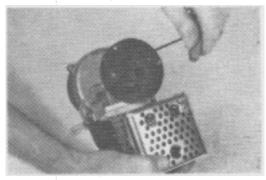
Remove four mounting screws from reed plate and carburetor mount.
